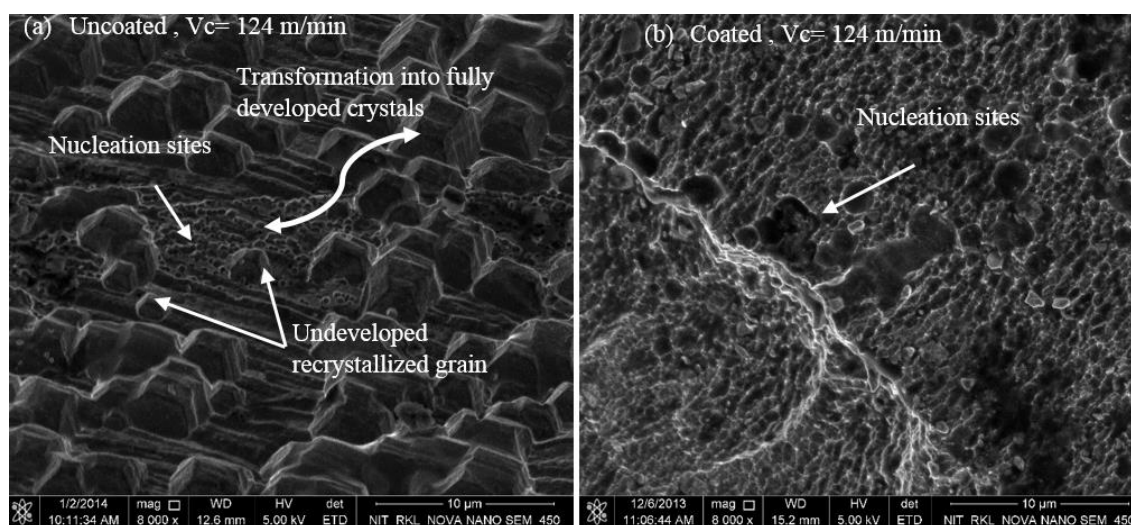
Magnified view of micro features of the machined surface of Incoloy 825 obtained during machining at 124 m/min cutting speed using (a) uncoated and (b) CVD coated inserts.
